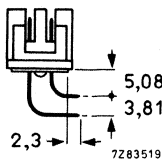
Male part with 90° angled dip-solder pins; dimensions are identical with those in Fig. 2, except as shown.
